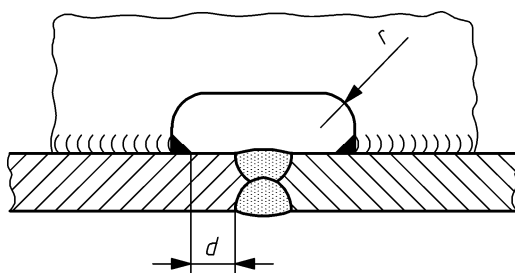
Stiffeners fitted perpendicularly to a longitudinal weld
